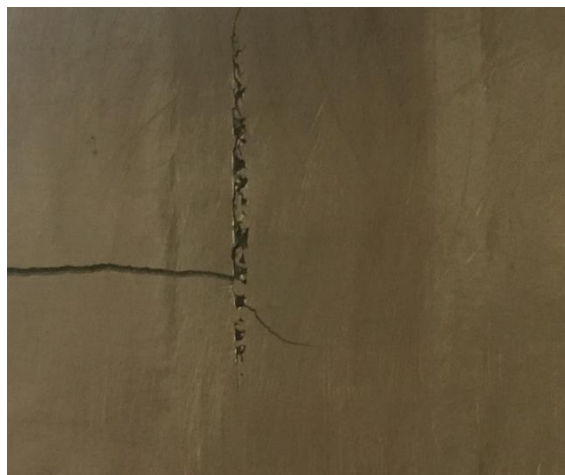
Interaction between the propagating crack and surface defects of the weld
